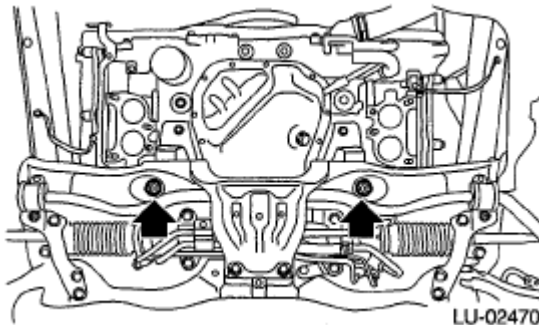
Locating Nuts Which Hold Engine Mount To Front Crossmember
